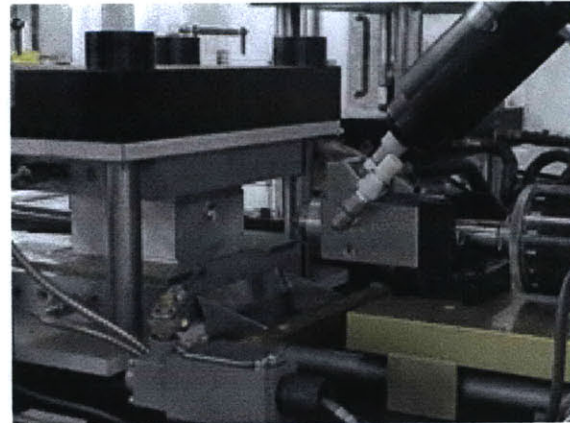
Liquid Silicone Rubber (LSR) Injection Molding Machine
